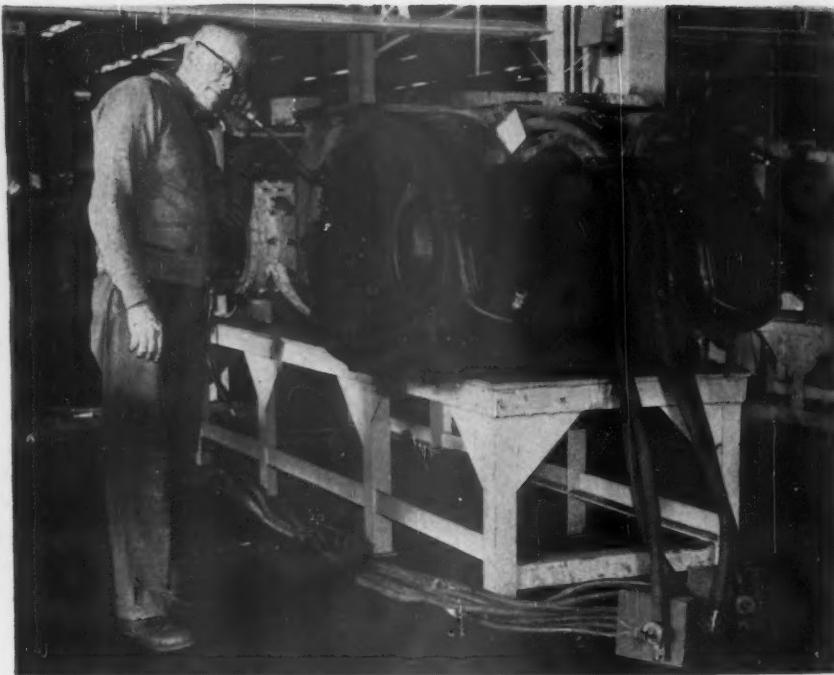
Traction motor bearings can be given a quick check by listening to them while the motor is running light.
